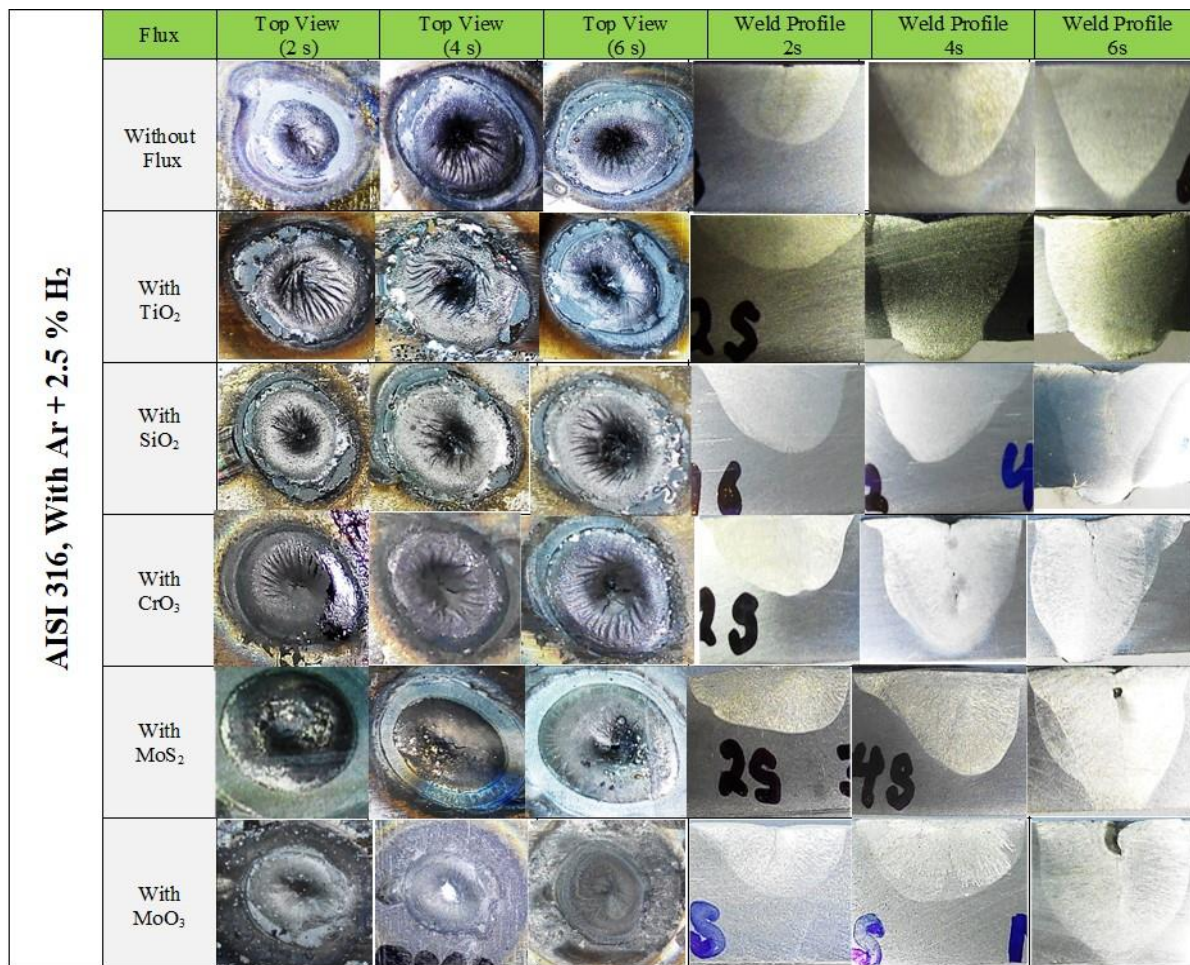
Showing the top surface and penetration of TIG and A-TIG welding of AISI 316 at different arc exposure times using Ar + 2.5 % H₂ shielding
